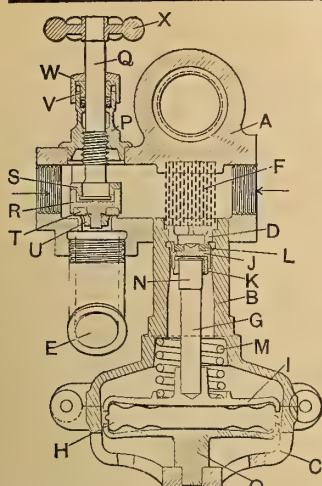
SECTION OF STEAM TRAP No. 138R.
